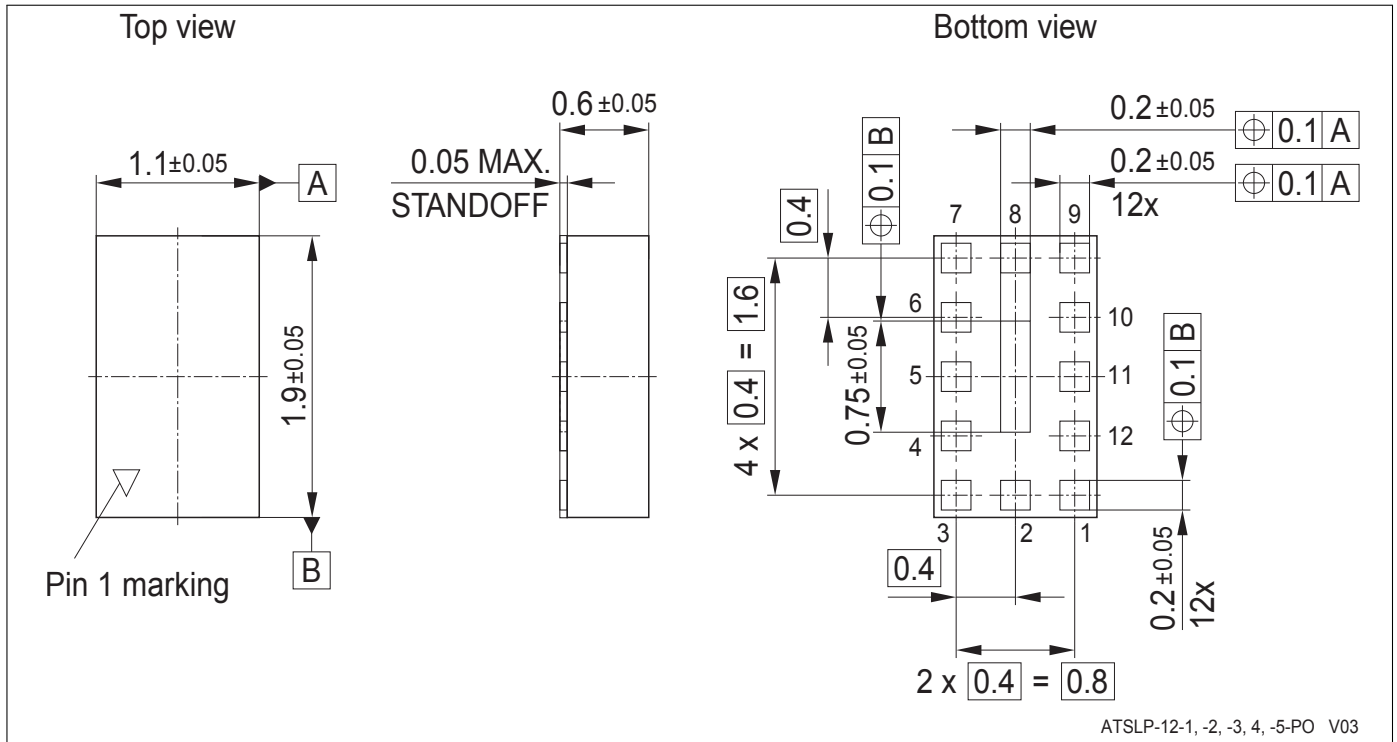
ATSLP-12-1 Package Outline (top, side and bottom views)
